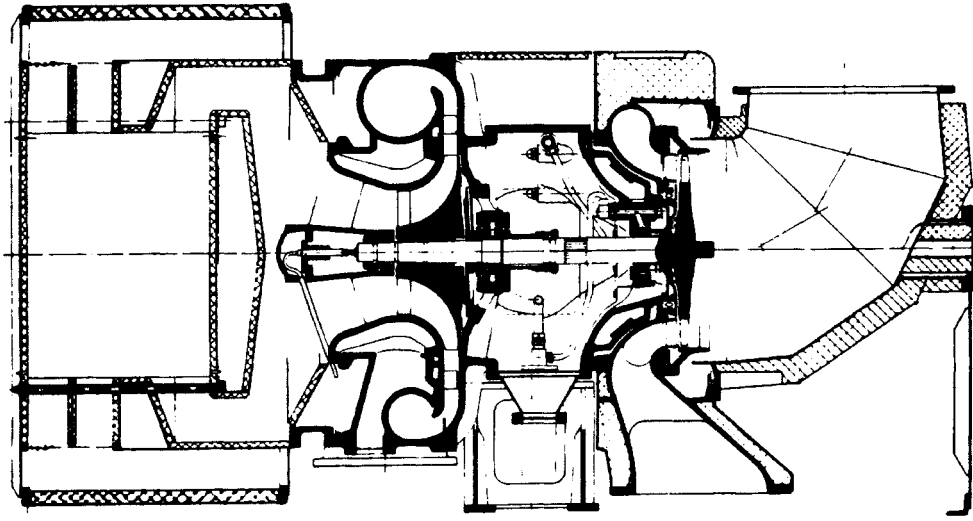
A large turbocharger with axial turbine but inboard bearings (M.A.N.)
